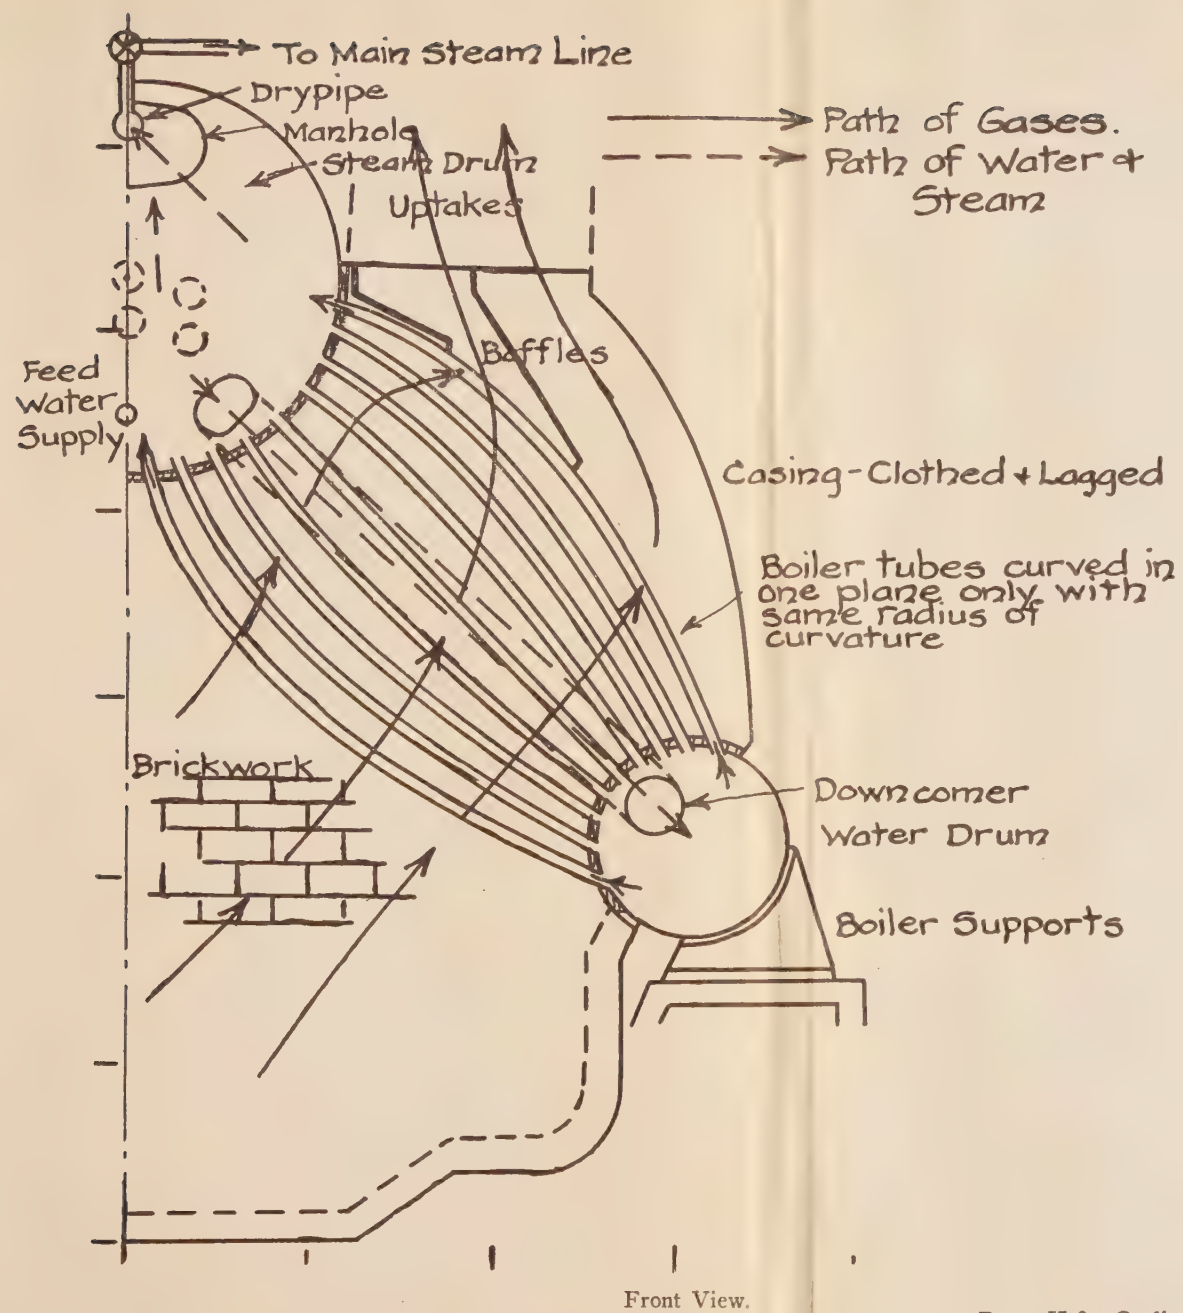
Outline Sketch of B. & W. Express Boiler.
